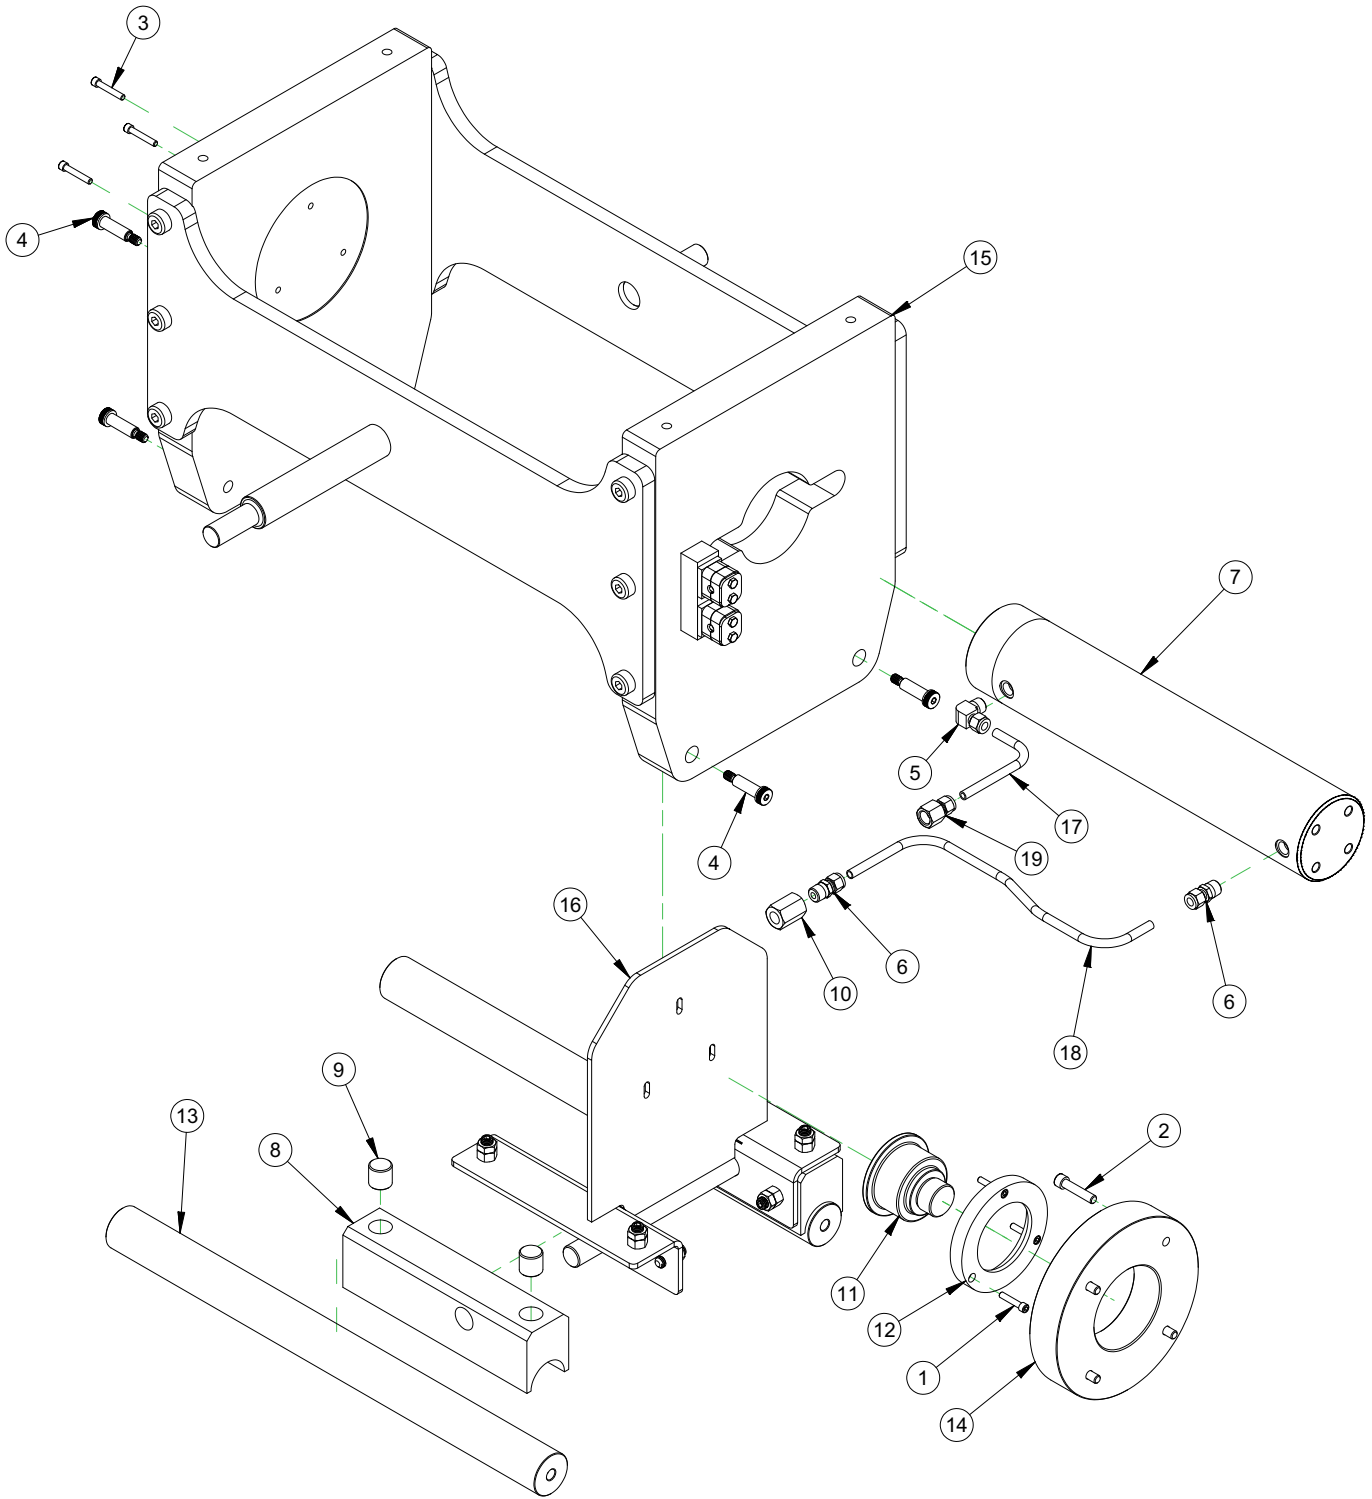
USV-2-25T ASSEMBLY 2 (P/N 90339)
